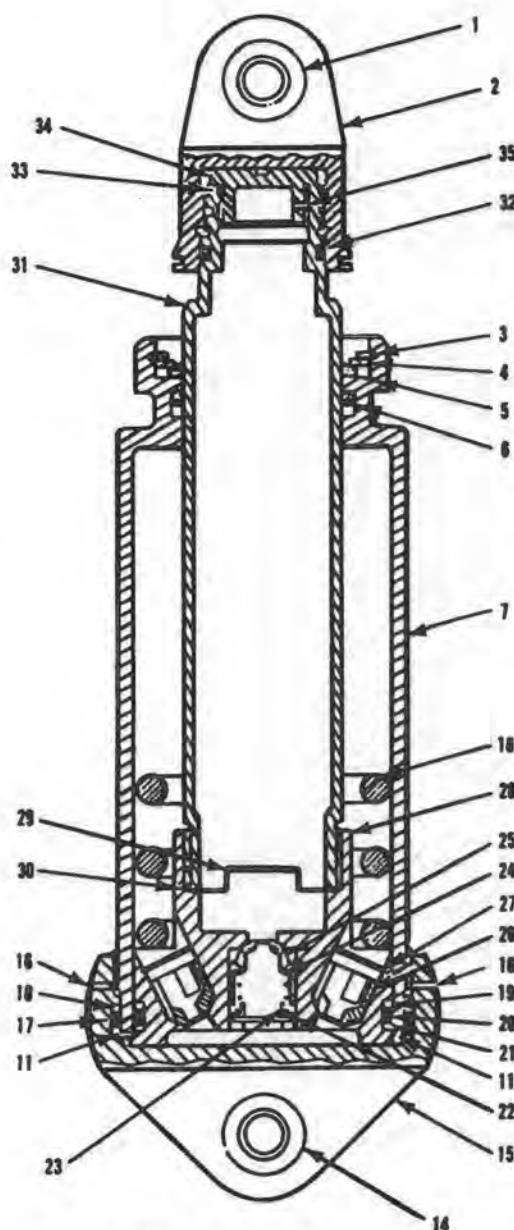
C. Poppet-Type Damper Assembly - Exploded and Section Views (Sheet 1 of 2)
